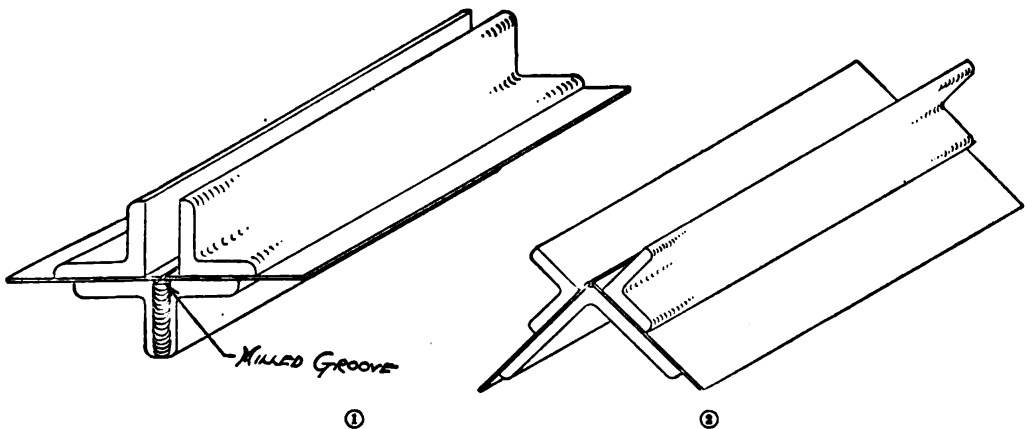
Angle iron welding jigs for sheet metal.
